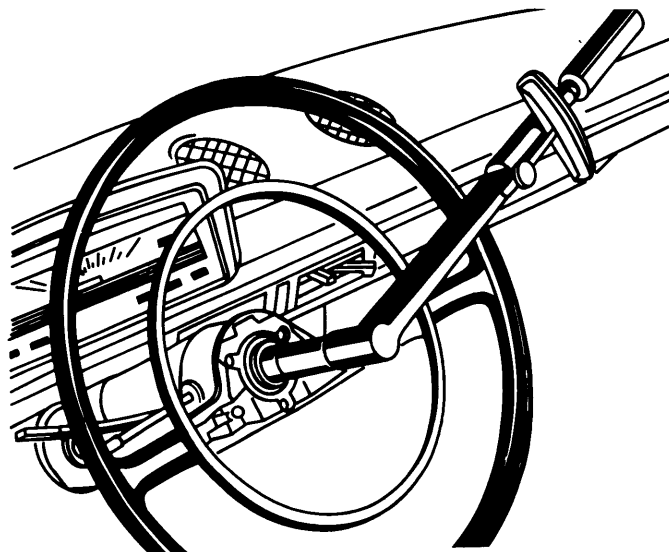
Using a Torque Wrench To Tighten Steering Wheel Nut
